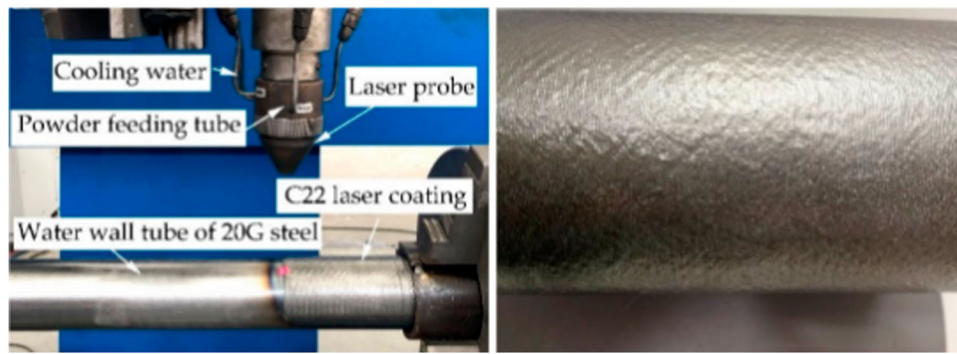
Photographs of (a) laser coating setup for boiler tubes and (b) 20G steel water wall tube using C22 laser coating [20].
